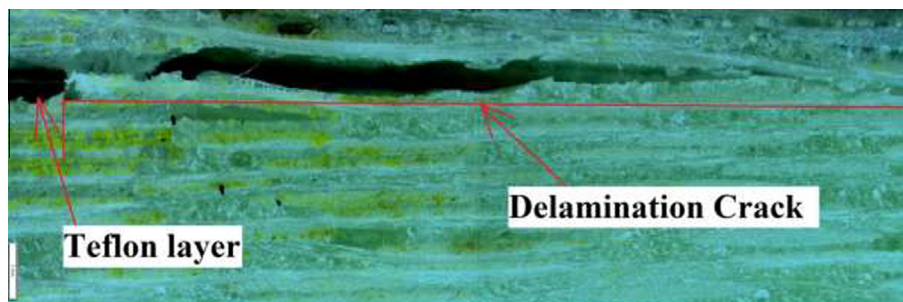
Photograph showing a 16.34 mm delamination crack extending from a Teflon insert, after loading to 35 kN.
